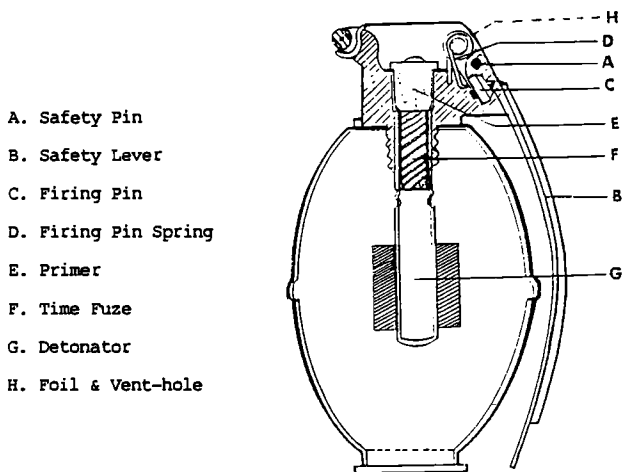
Schematic drawing of a hand grenade's mechanism.
